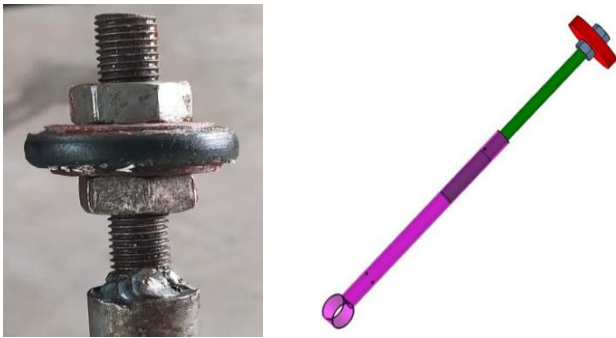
Perspective view of variable length connecting rod and piston assembly.
